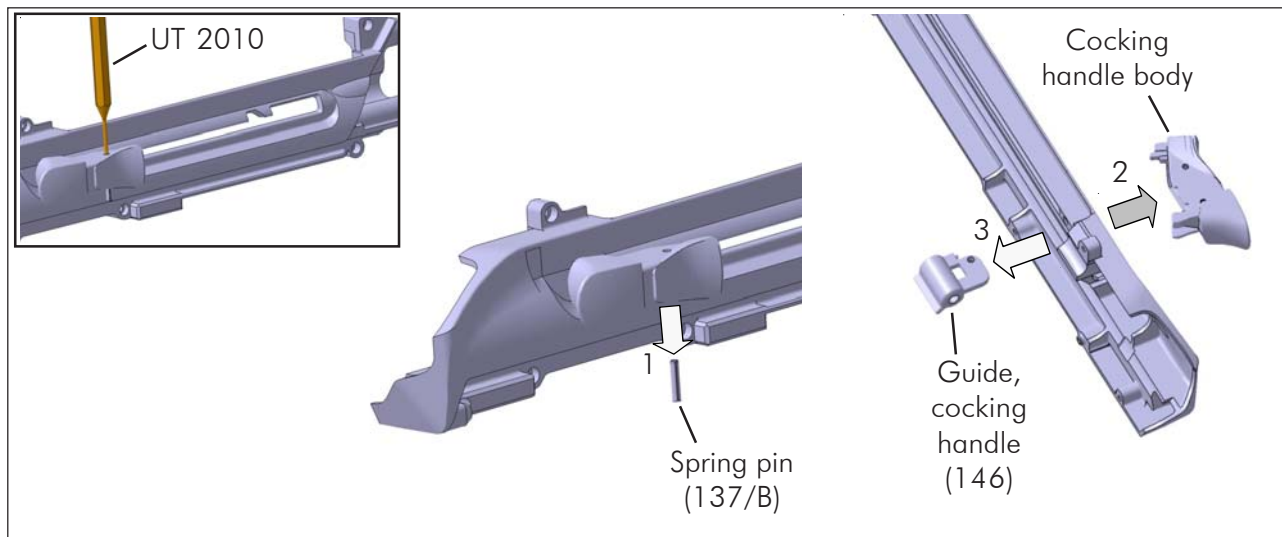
s - Removal of the cocking handle body and the guide, cocking handle (146)
